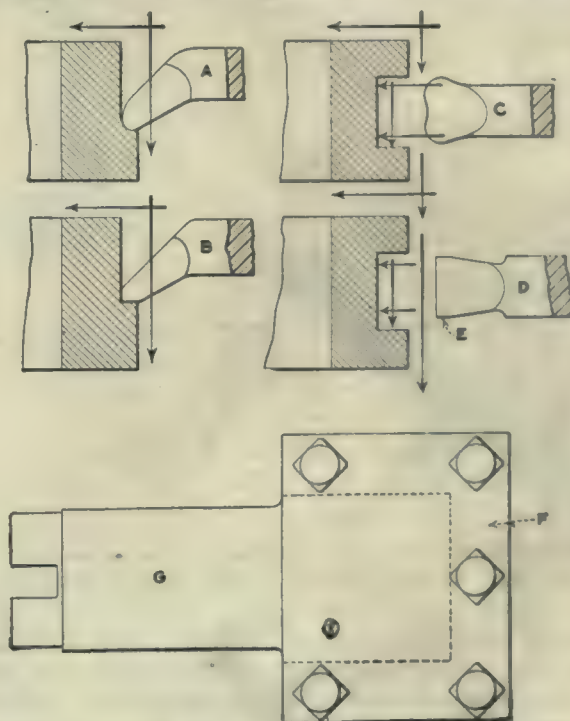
TOOLS AND TOOLHOLDER FOR VERTICAL TURRET LATHE
